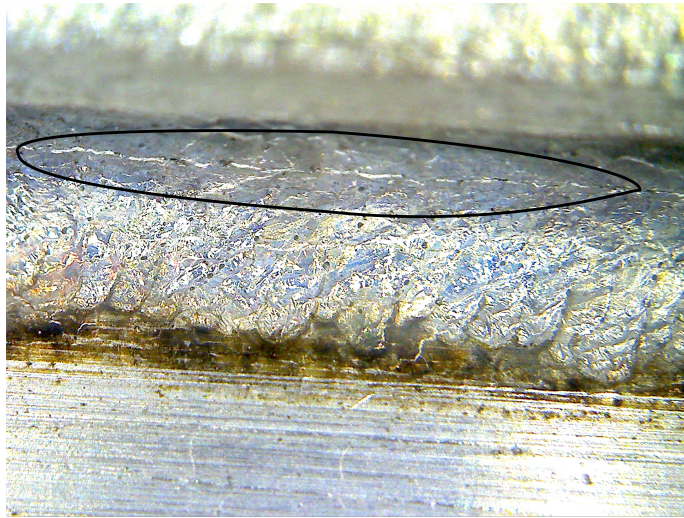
Picture of 6082-6082 LBW with a large crack along the welds length.
